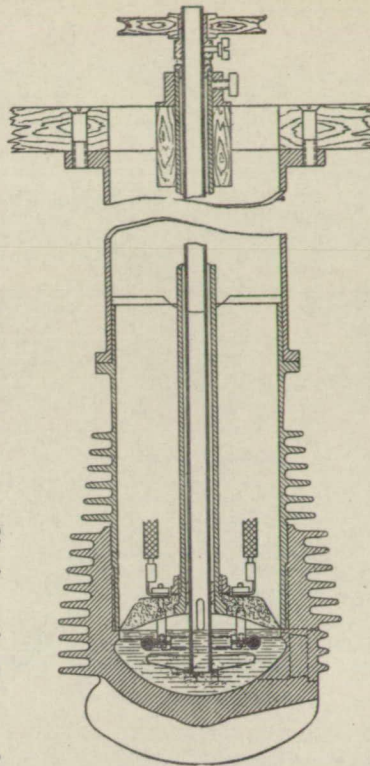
Heating apparatus in cylinder head. Electrically heated oil bath with stirrer and vapor outlet.
